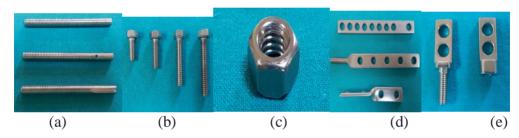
Components of Ilizarov: (a) threaded rods; (b) bolts; (c) nut; (d) plates; (e) posts [5].
